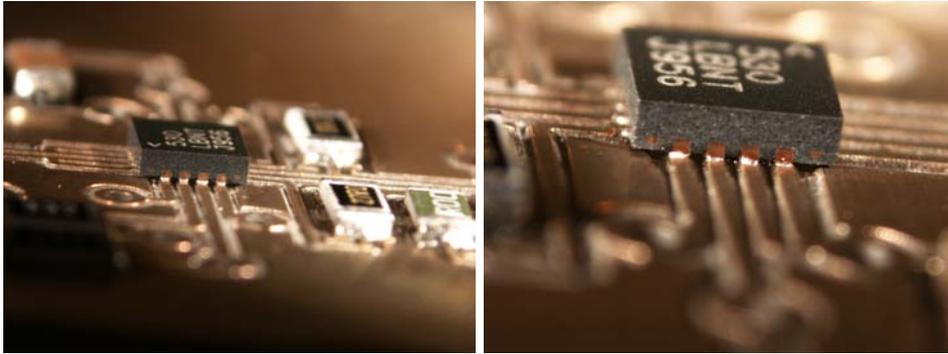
Perfectly soldered QFN package with pads located underneath. Package is 3 x 3 mm large
